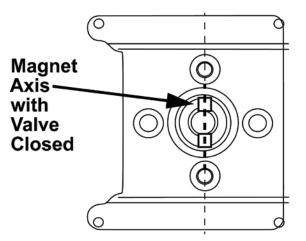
Magnet Orientation for Camflex with Valve Closed
